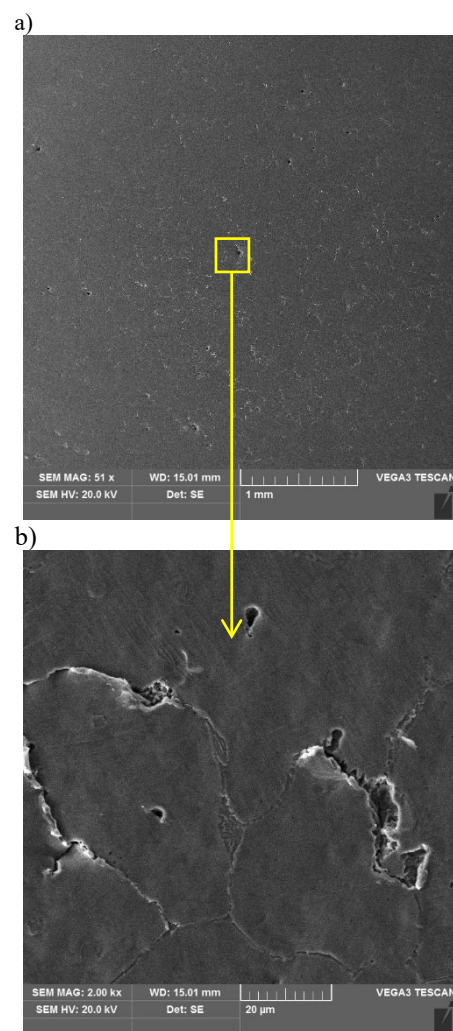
Representative surface view of the AISI 307 weld overlay after cavitation wear resistance testing
